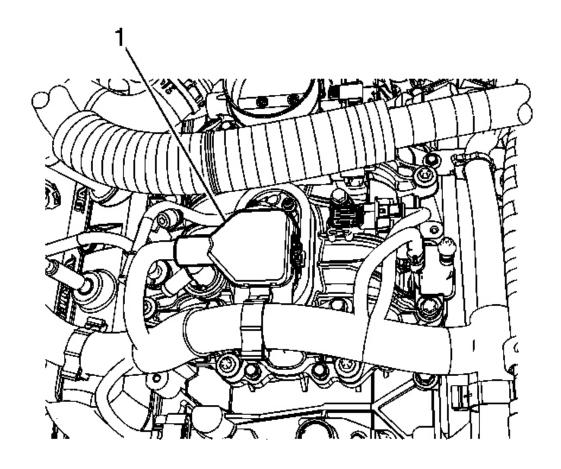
Control Port Injector Module Courtesy of GENERAL MOTORS CORP.
